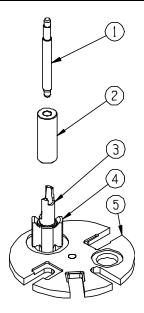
HH46, HH57 and HH68 Valve Guide and Shock Absorber Disassembly 1-Punch, 2-Valve Guide Pusher, 3-Valve Guide, 4-Shock Absorber, 5-Press Plate
